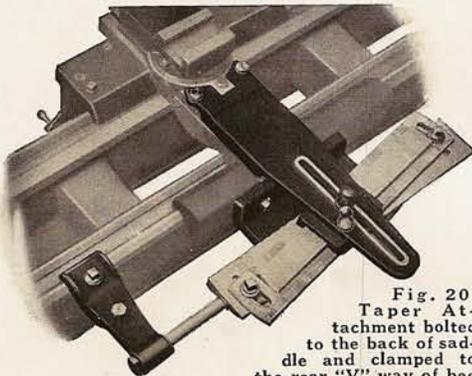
Taper Attachment bolted to the back of saddle and clamped to the rear "V" way of bed
